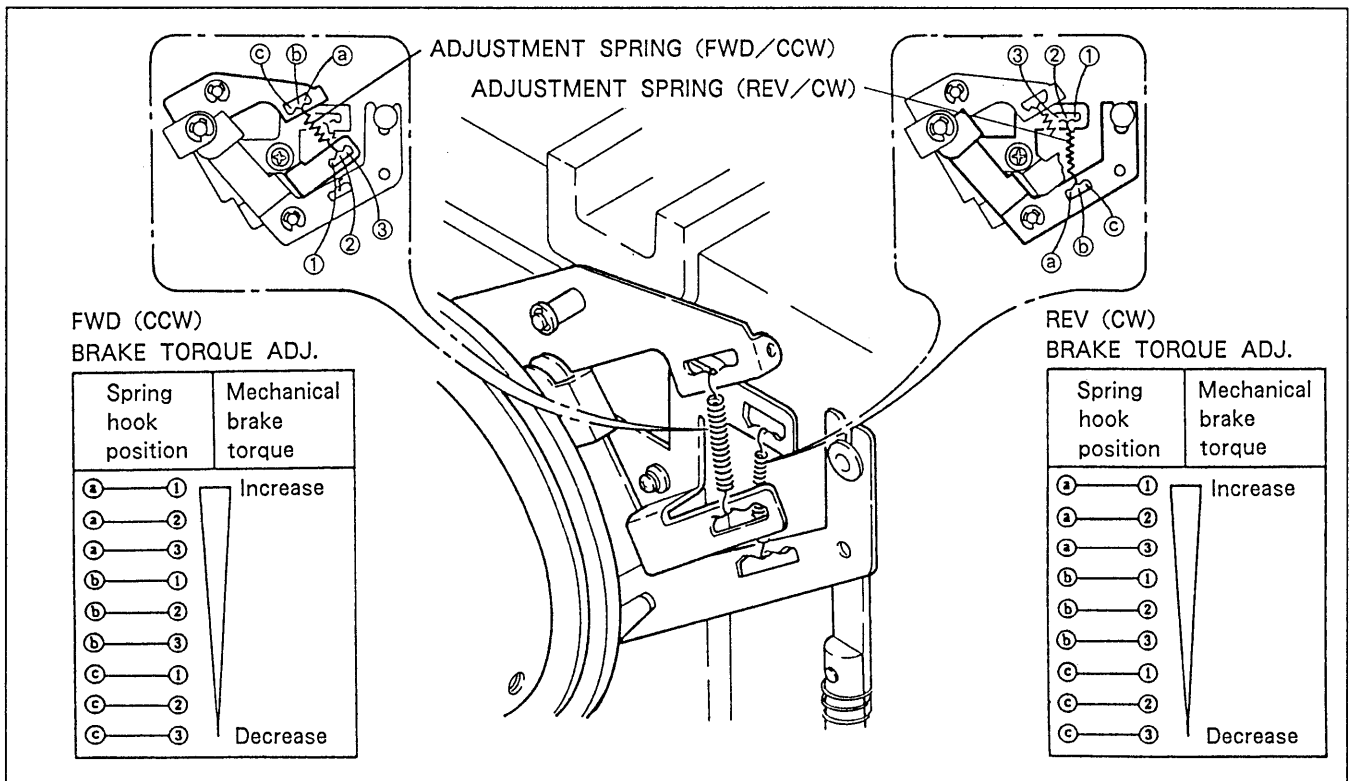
Mechanical Brake Torque Adjustment (2)
